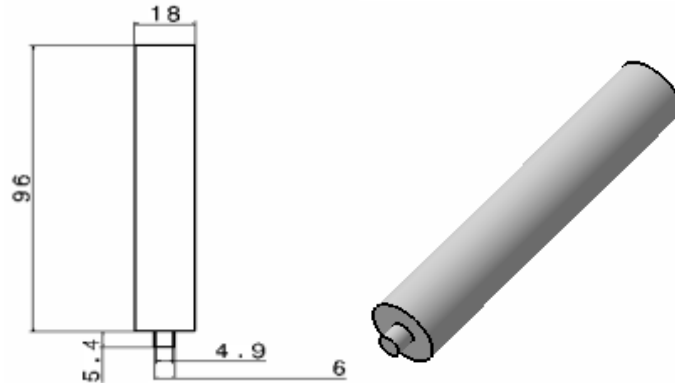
D and 2D model of FSW tool with Threaded Cylindrical Tool Pin
